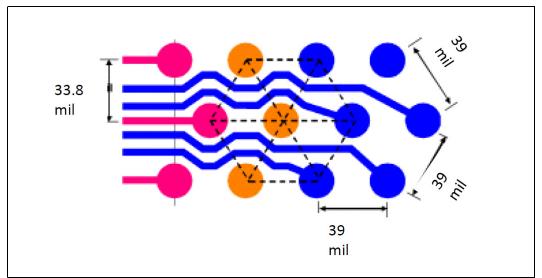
LGA3647-0 Socket PCB Land Pattern
